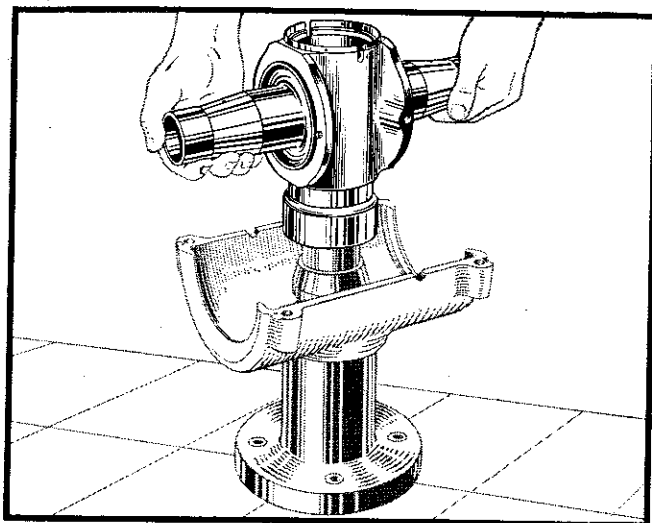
Installing Spider on Assembly & Balance Sleeve
